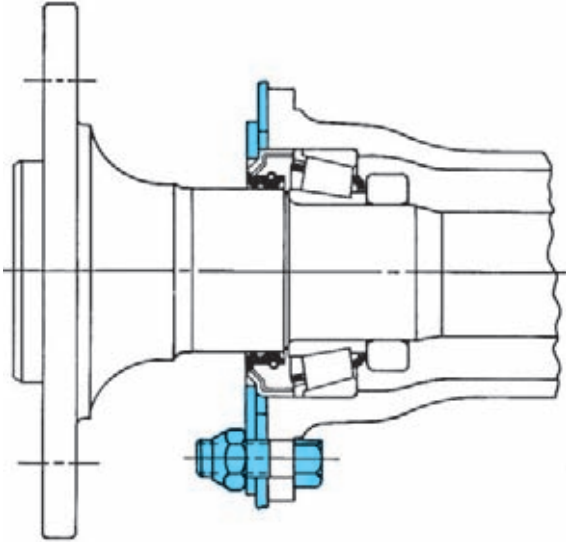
The bearing retainer bolts are being removed to allow removal of a bearing retained axle. The hole in the axle flange allows the use of a socket and extension. (Courtesy of Dana Corporation)
